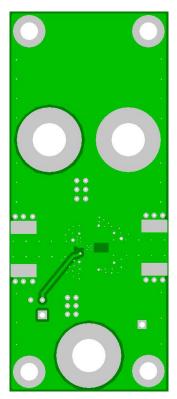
THS4303EVM Board Layout (Bottom Layer)
